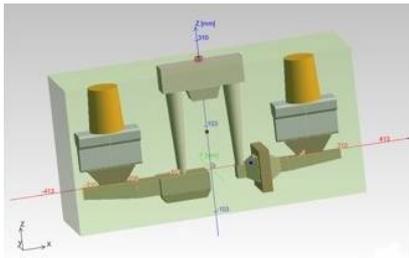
Drawing of the vertically parted mold design showing the two-bottom gated modified Y-block castings attached to two balanced gating systems. The gating system on the right contains the filter while the other gating system on the left is unfiltered.
